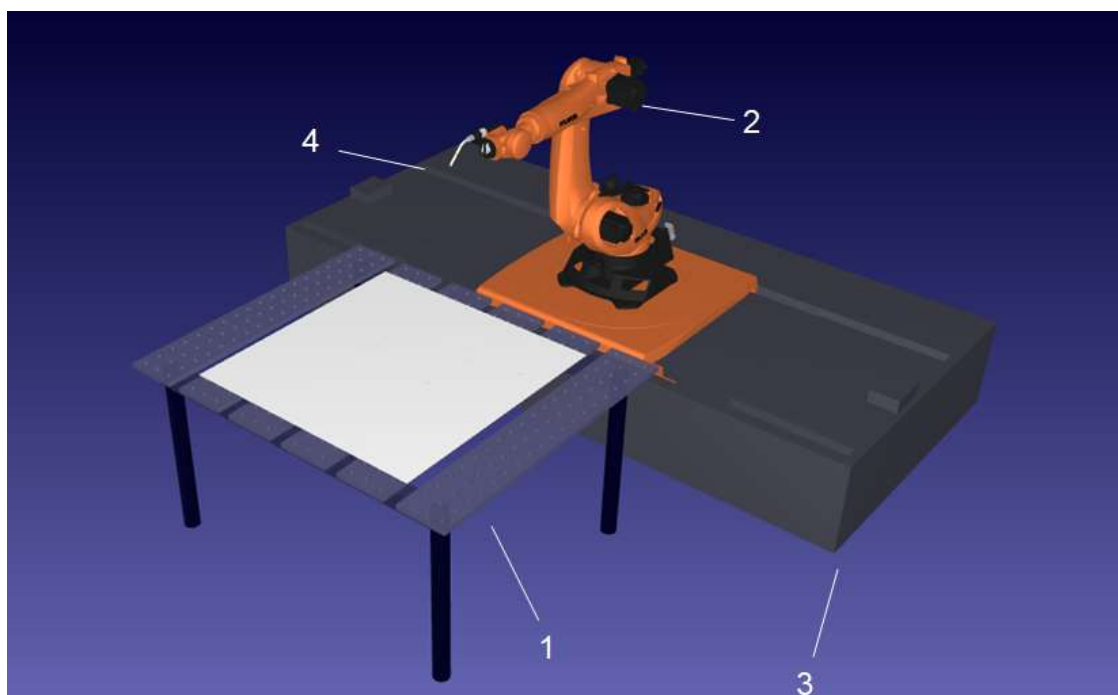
Robotic cell: 1 – workplace; 2 – industrial robot; 3 – linear guide; 4 – working tool
